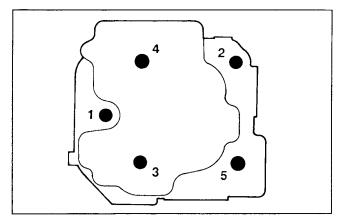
Cylinder Head Fastener Tightening Sequence.
